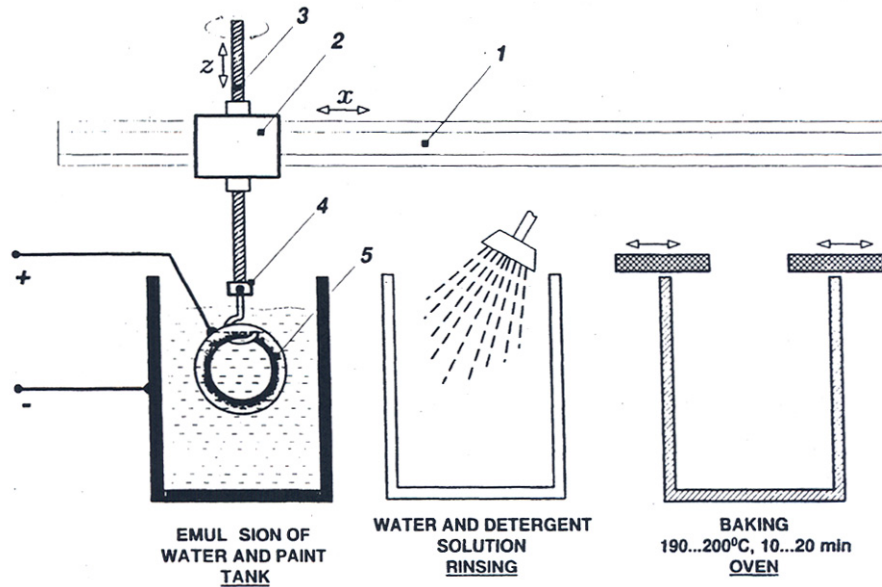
Automated electro coating line with linear motor driven work-pieces. 1 - monorail, 2 - LSM or HLSM, 3 - ball lead screw driven by a rotary servo motor, 4 - gripper, 5 - work piece.
